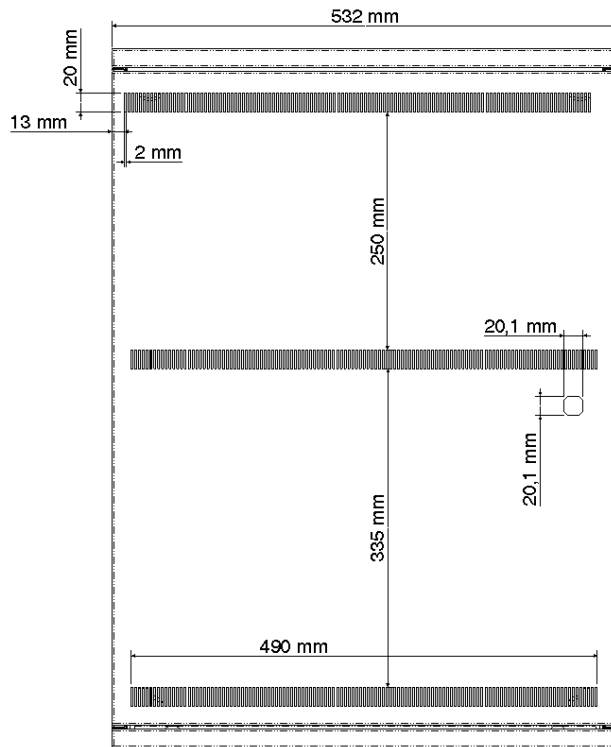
Front view of the indoor WM-UP8/UP16 Cabinet container (with UE16 version mounted inside)
